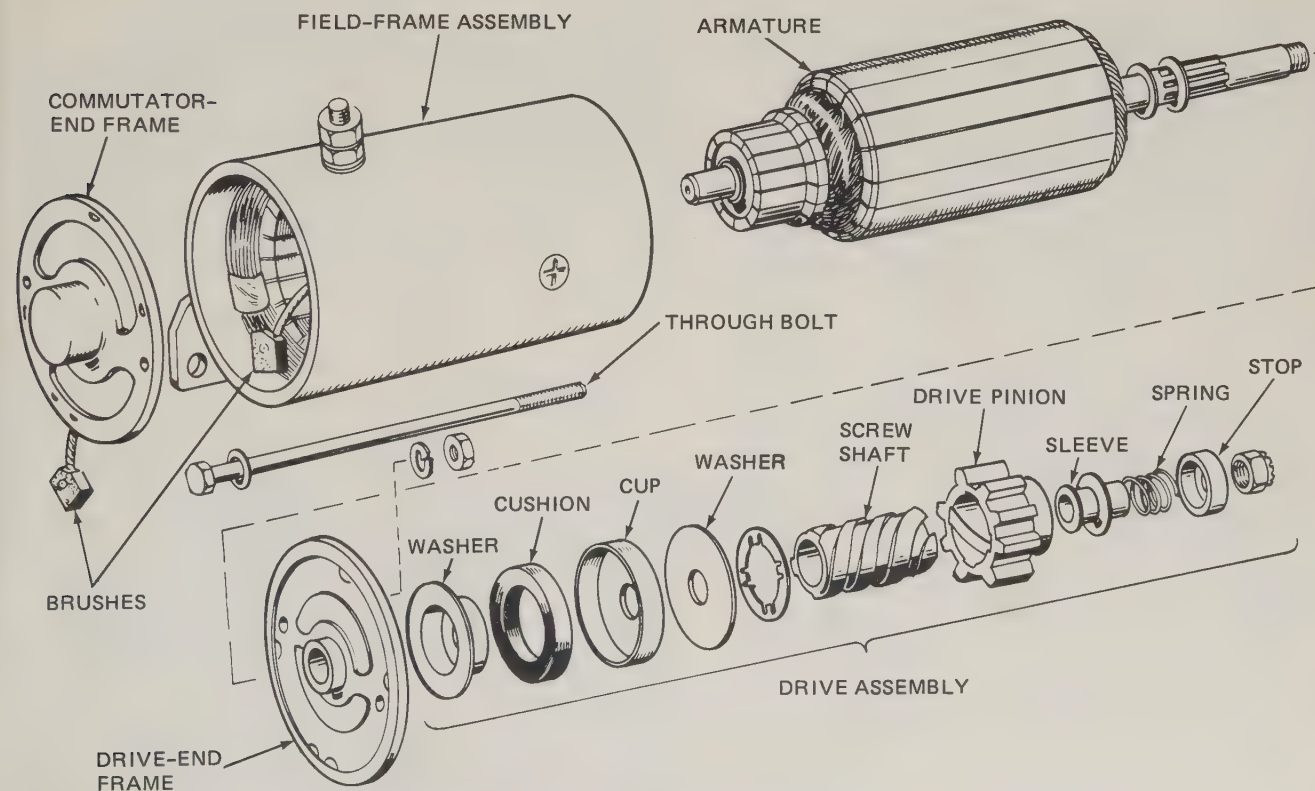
Disassembled view of a rubber-compression-type drive and the starting motor with which it is used. (Onan Corporation)
